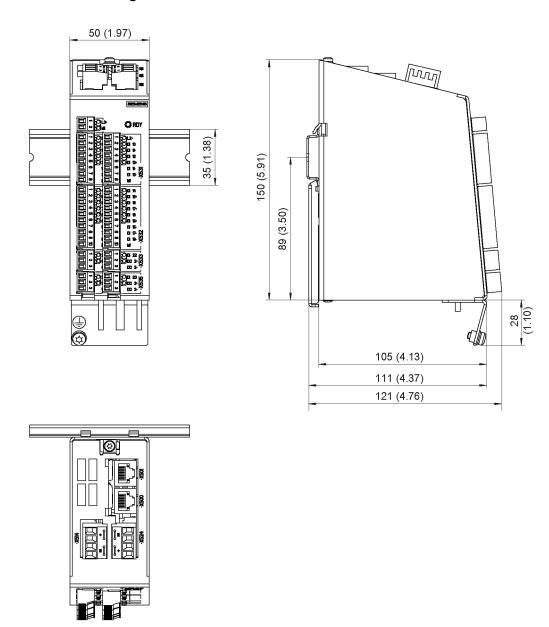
Dimension drawing of Terminal Module TM54F, all data in mm and (inches)
